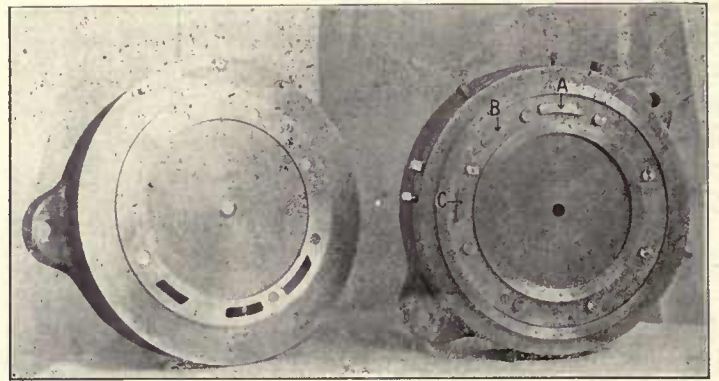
Dies for Stamping Gaskets for Air Pump Heads.
